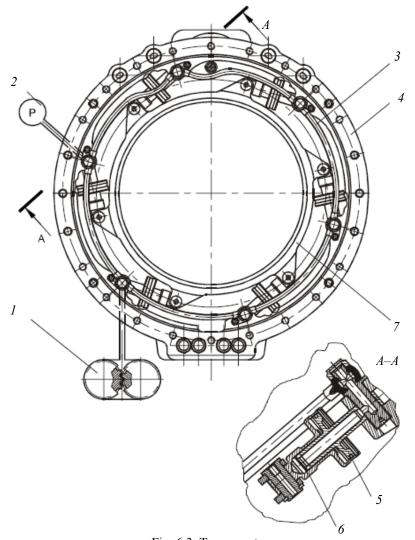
Torquemeter: *I* — torquemeter oil pump; *2* — oil pressure transmitter; *3* — manifold; *4* — reduction gear casing; *5* — piston; *6* — hydraulic actuator; *7* — torquemeter rim
